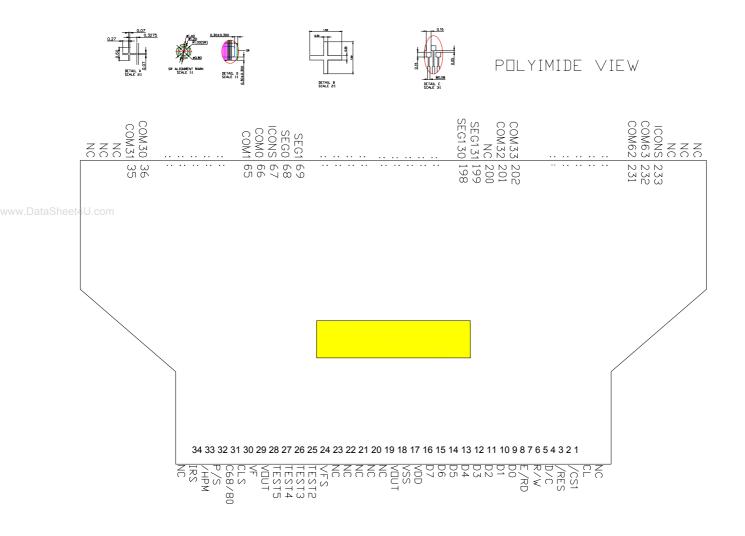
SSD1805TR1 TAB Drawing (Detail view & pin assignment)
